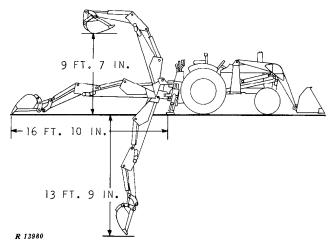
Backhoe Equipped with 24 In. Standard Bucket
